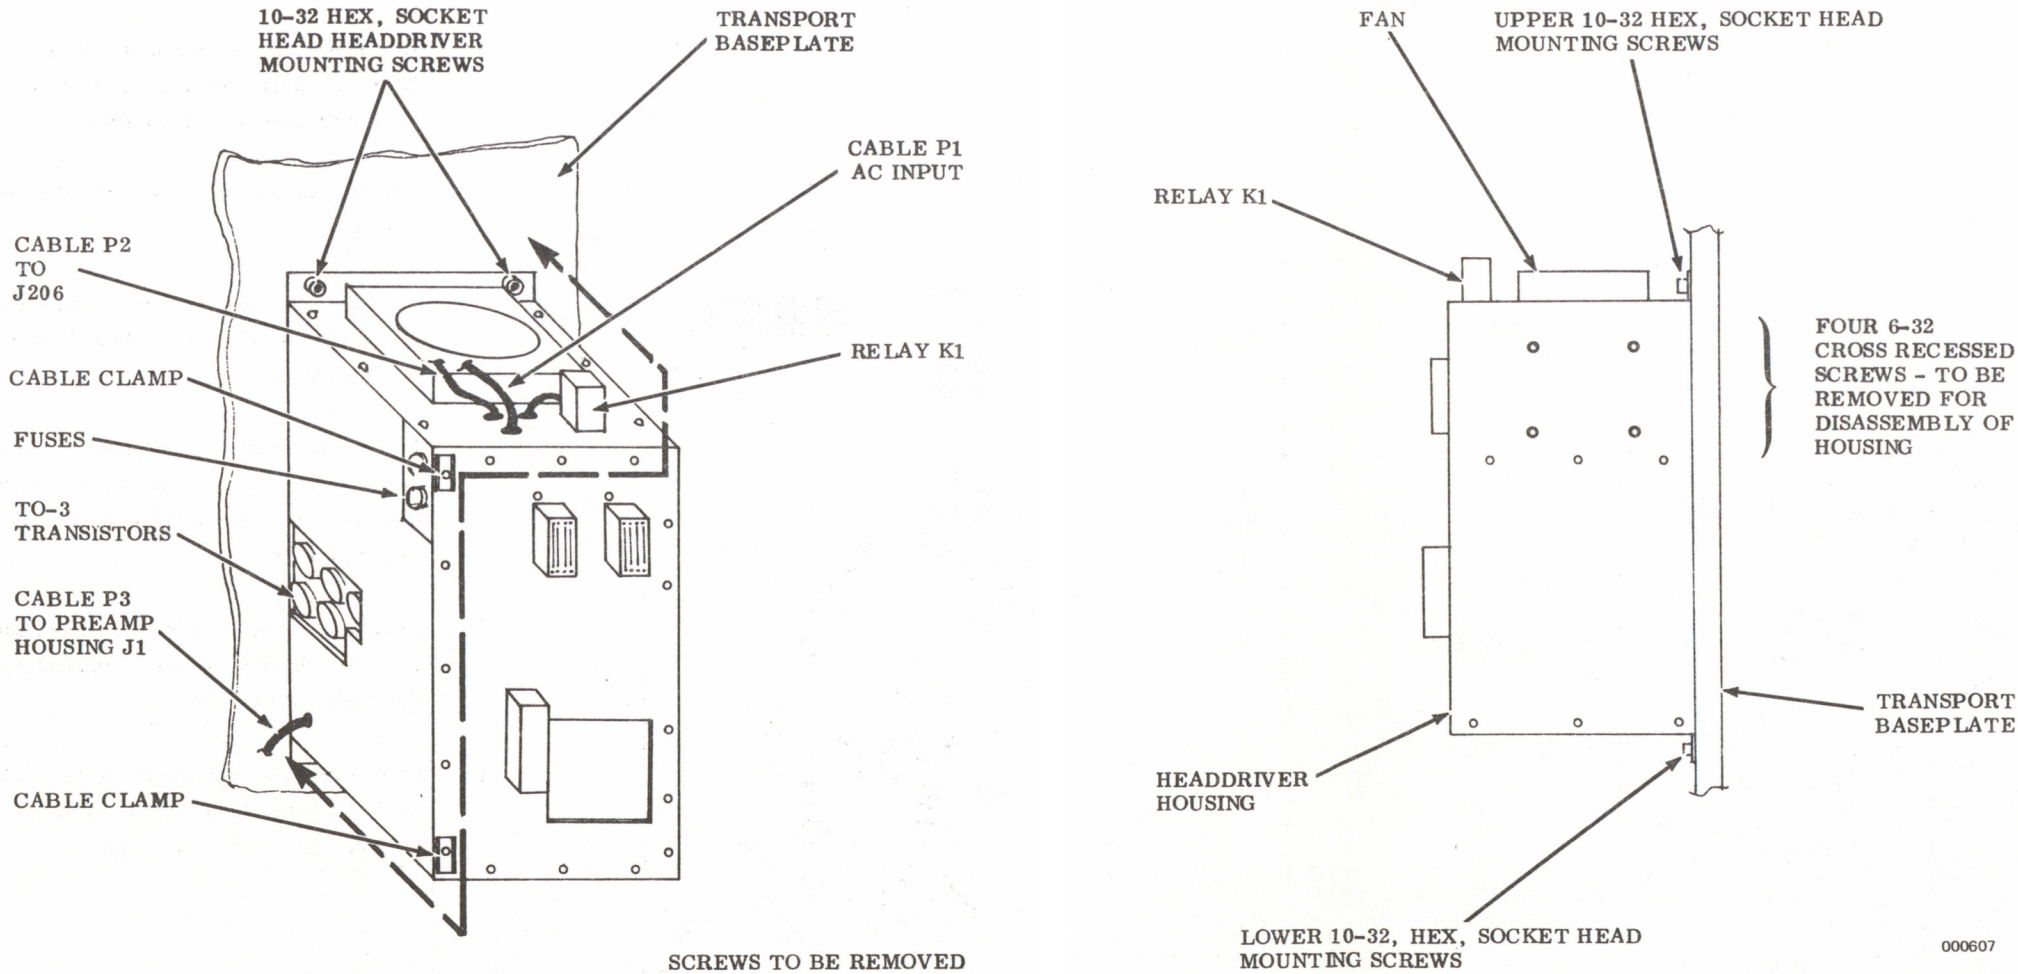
Headdriver Housing - Disassembly Details - Extender
